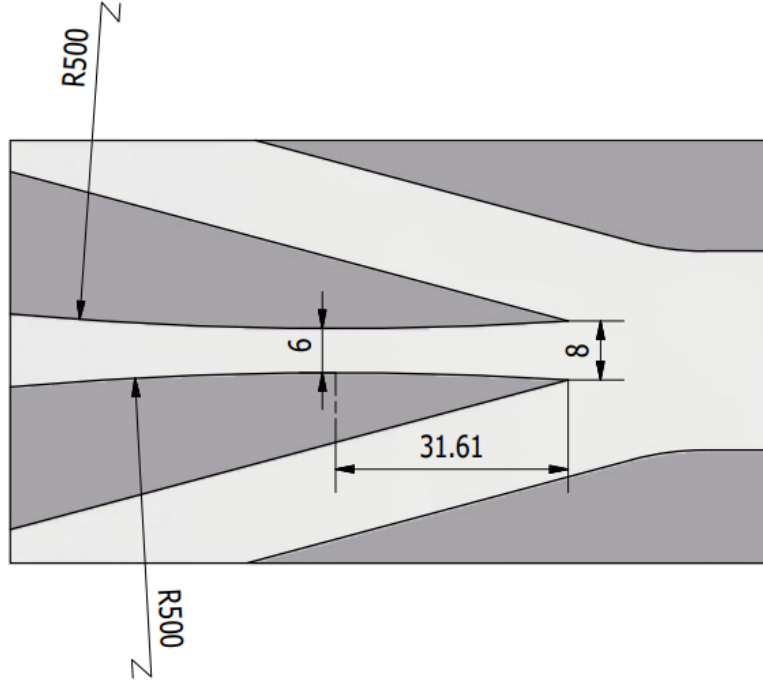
Dimensioned drawing of the new primary nozzle geometry. All dimensions are in mm [27].
